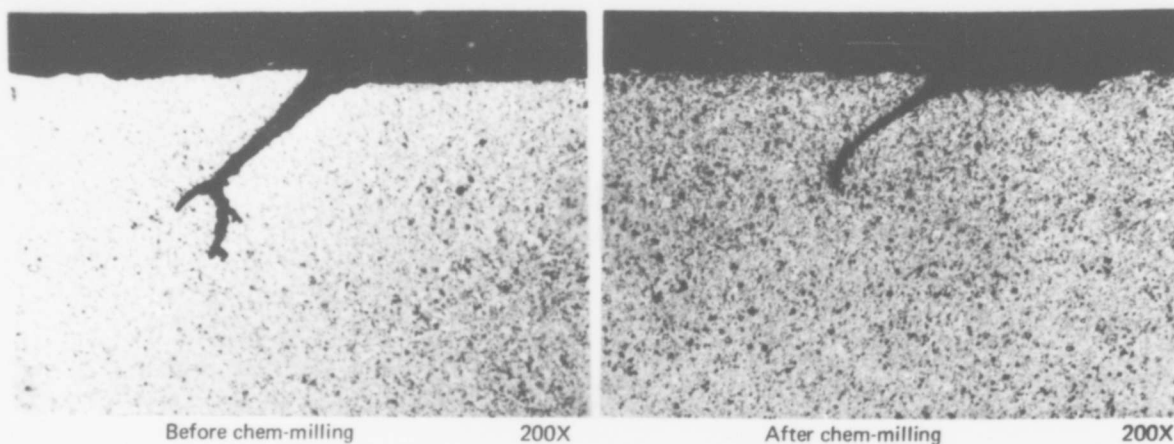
ANOTHER SECTION OF THE CRACK SHOWN IN FIGURE 24 WHICH SHOWS THAT AN EXISTING CRACK WILL NOT GROW IN DEPTH DURING CHEM-MILLING; DEPTH .0075 IN. BEFORE; .005 IN. AFTER
